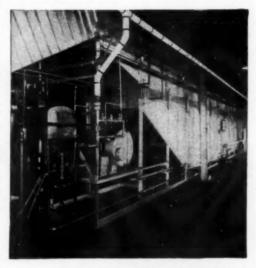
Solvent still that may be used for batch or continuous reclaiming of solvent, is shown here applied to a large automatic vapor design of degreaser equipped with double monorail conveyor of "through" type.
